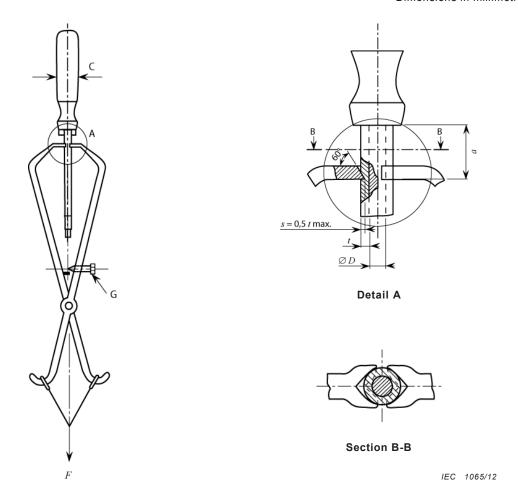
Principle of the testing device for checking adhesion of the insulating coating on conductive parts of the insulated hand tools –
